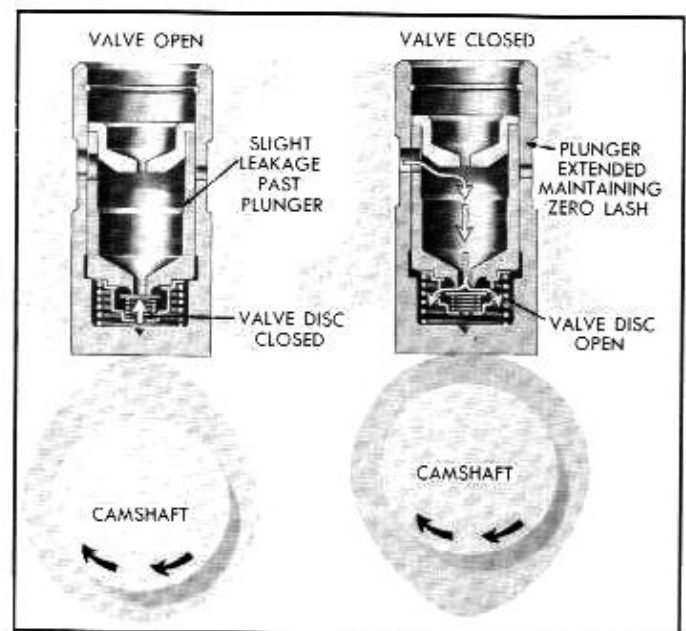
C-23—Operation of Hydraulic Tappet Assembly
